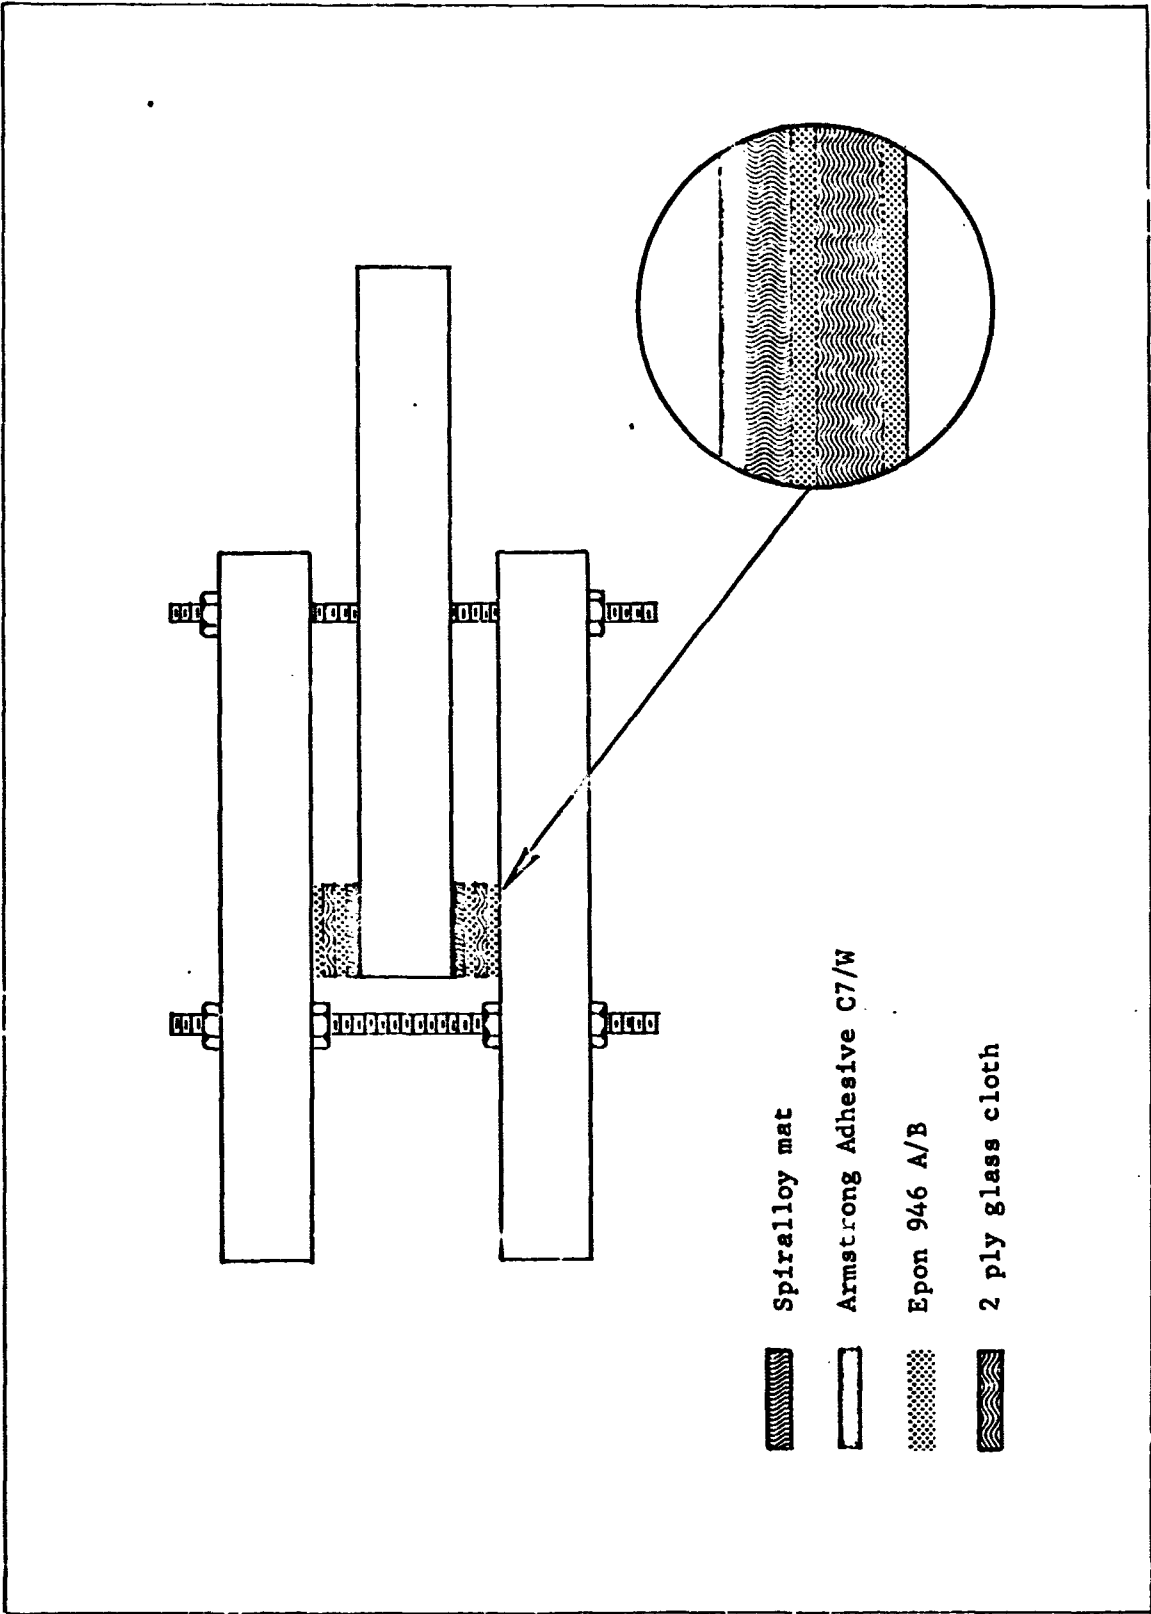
THREE PLATE SHEAR SPECIMENS
